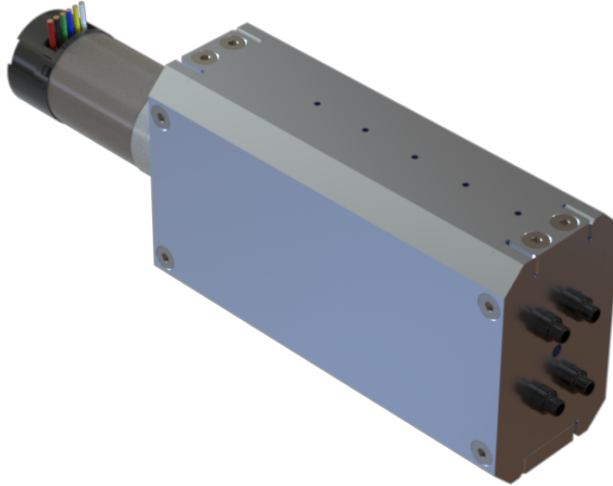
The final version of the CASET linear actuator. The actuator was designed to be manufactured out of aluminum, but is also fully printable out of PLA, with a significantly lower failure point under loading.
